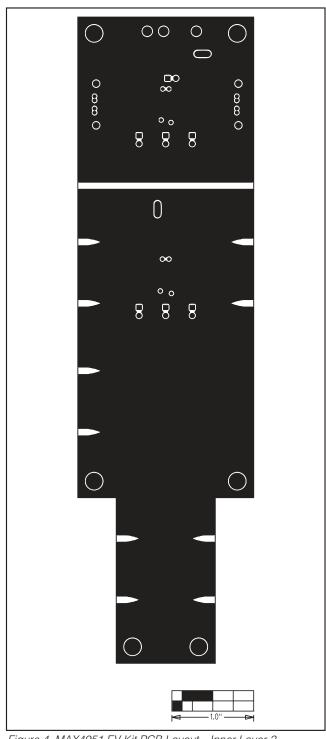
MAX4951 EV Kit PCB Layout—Inner Layer 2
